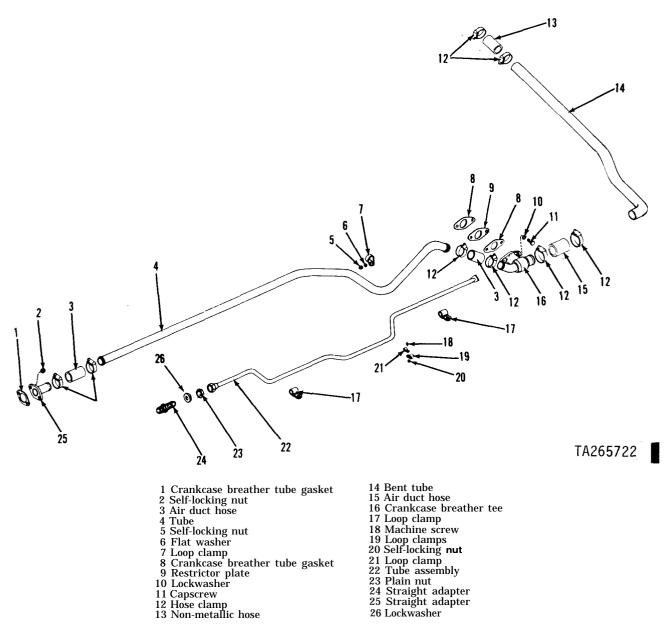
Crankcase breather tube and fire extinguisher tube - exploded view.
